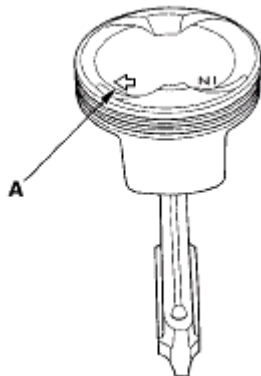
Identifying Piston Position Mark To Face Cam Chain Side Of Engine
